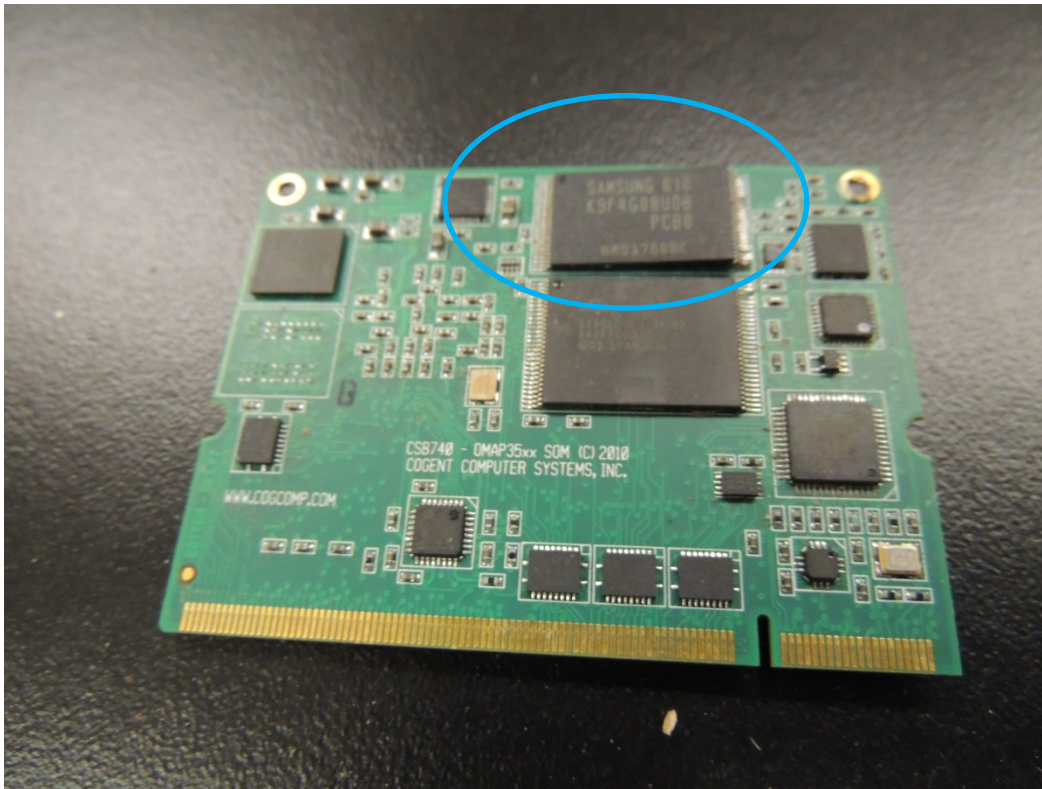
Removed AF-4500 Memory Board with partially detached chip highlighted
